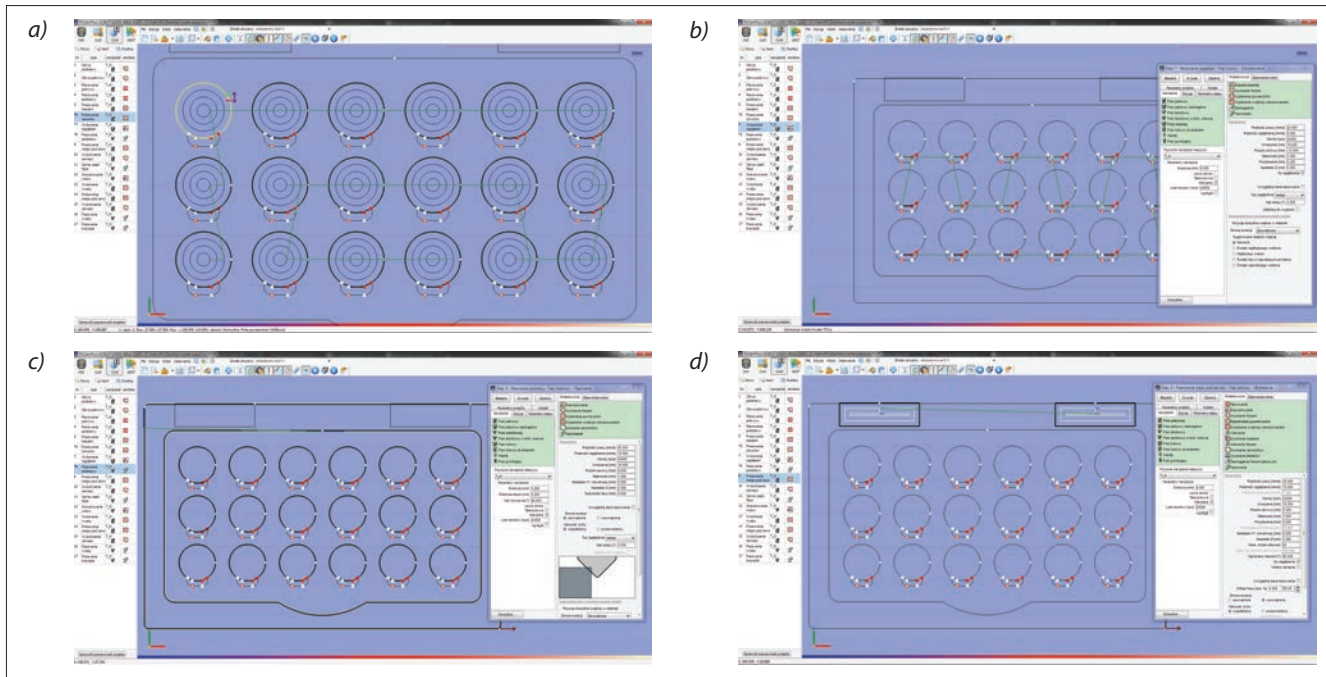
Preparation of processing in the base cutout: a) making holes for coins, b) making cutouts to facilitate coin removal, c) chamfering the edges of the holes, d) making space for hinges
